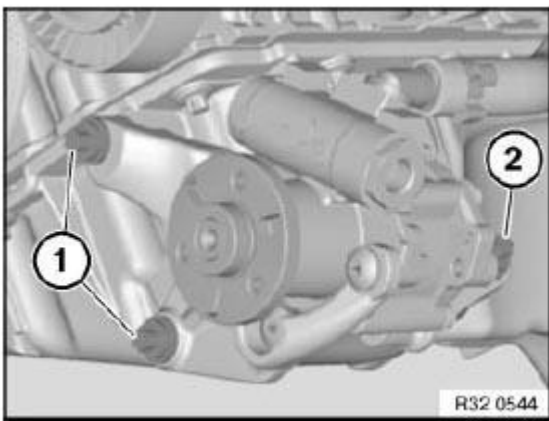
Identifying Power Steering Pump Bracket Bolts
